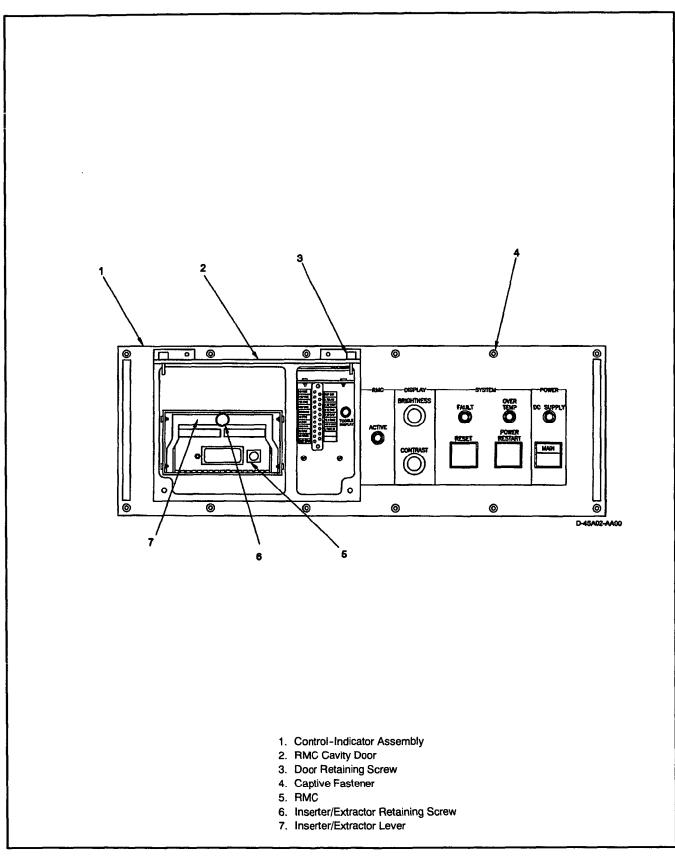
Control-Indicator Assembly C-12514/ASQ-225 and Control Indicator Set AN/ASQ-225 Components (Sheet 1 of 10)
